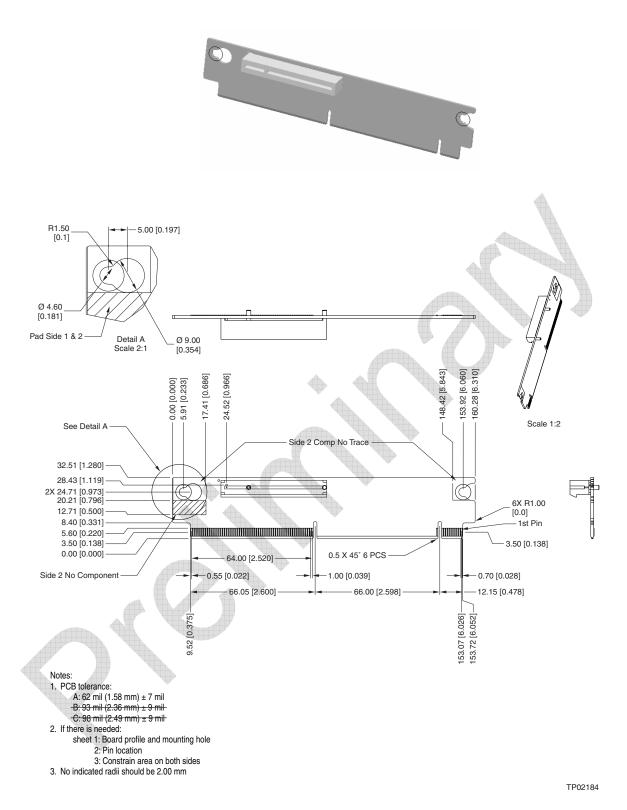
1U Full Height PCI Express* Riser Card Mechanical Drawing
